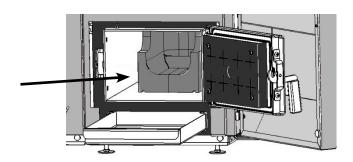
Removal of the ceramic stones from the lower combustion chamber.
